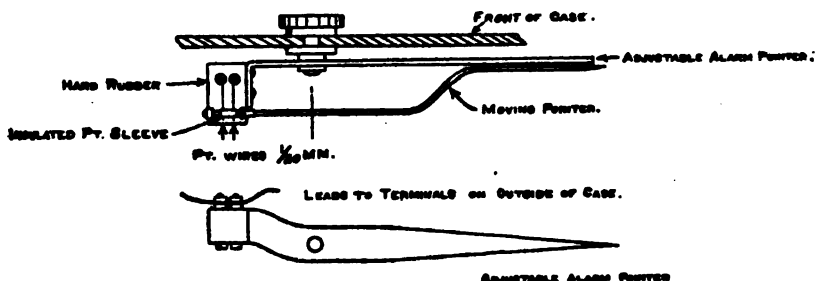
Contact-making arrangement for voltmeter used with indicator "A"
